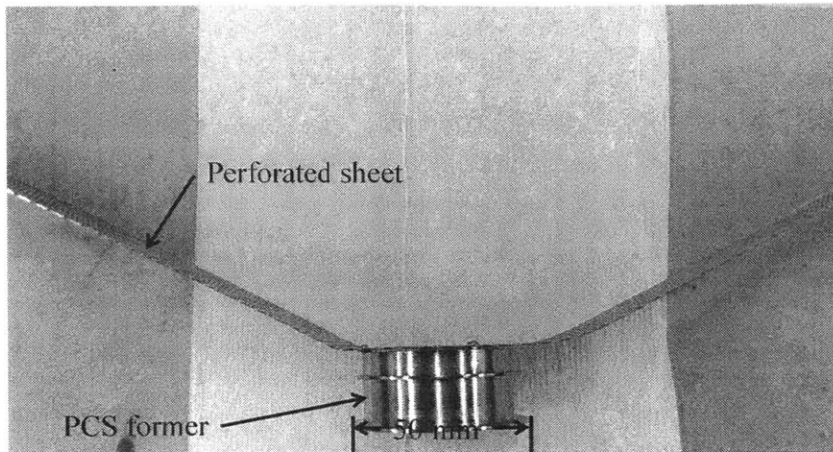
PCS former attached to perforated stainless steel sheet.
